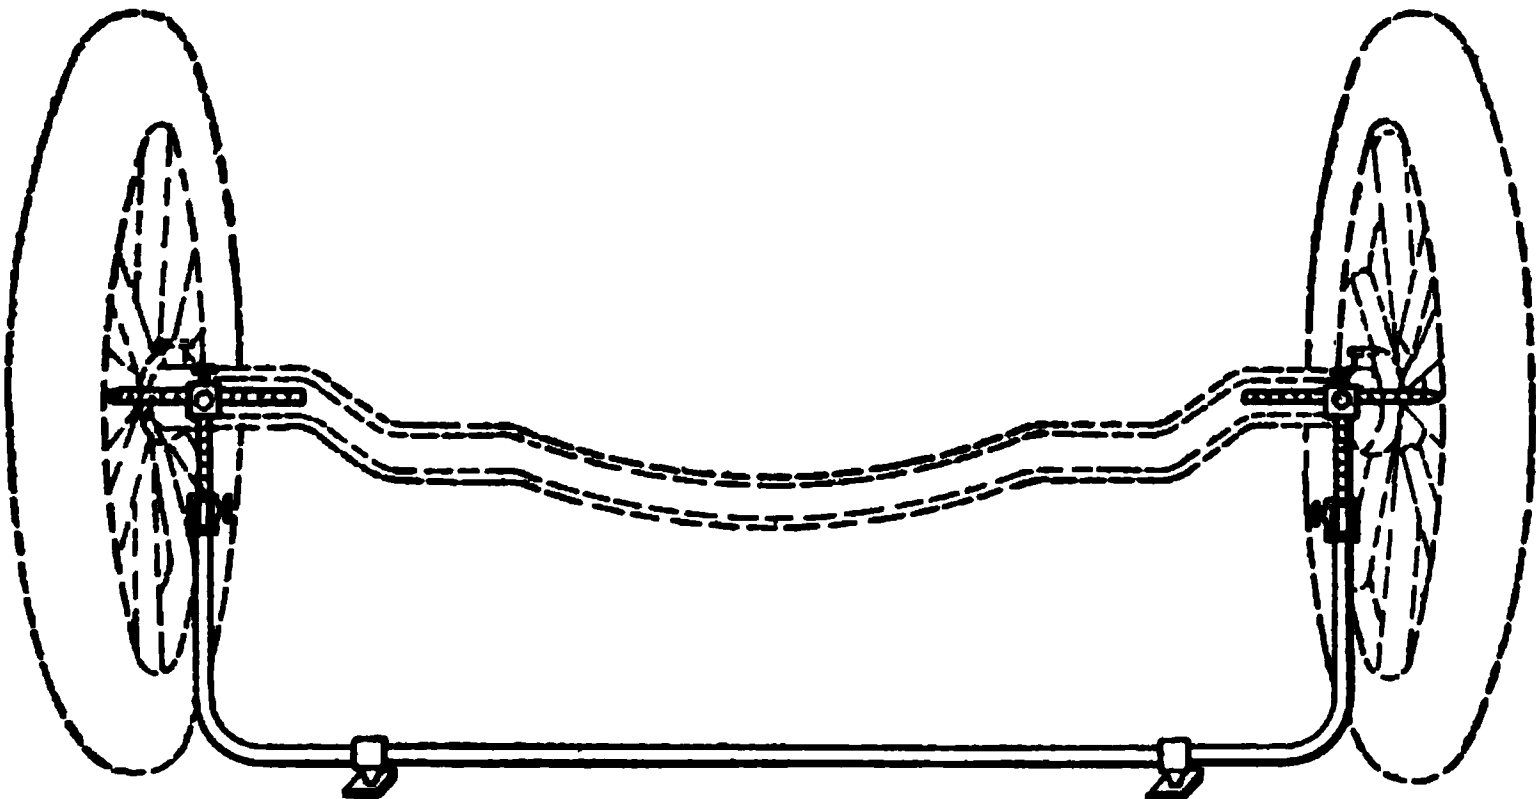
Accurate Measuring Rod for Truing-Up Wheels. Better Design than Fig. 369
